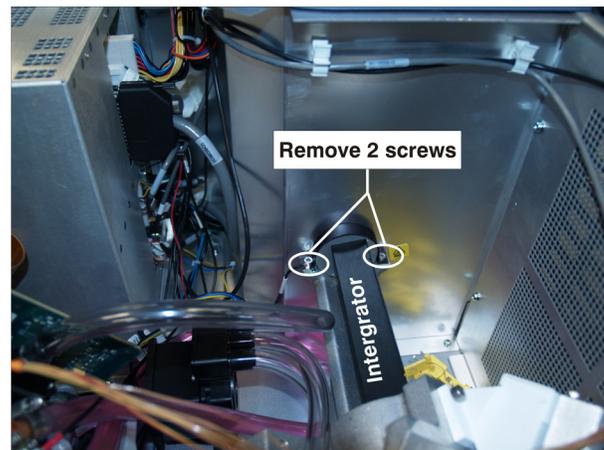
REMOVE INTEGRATOR ASSEMBLY
